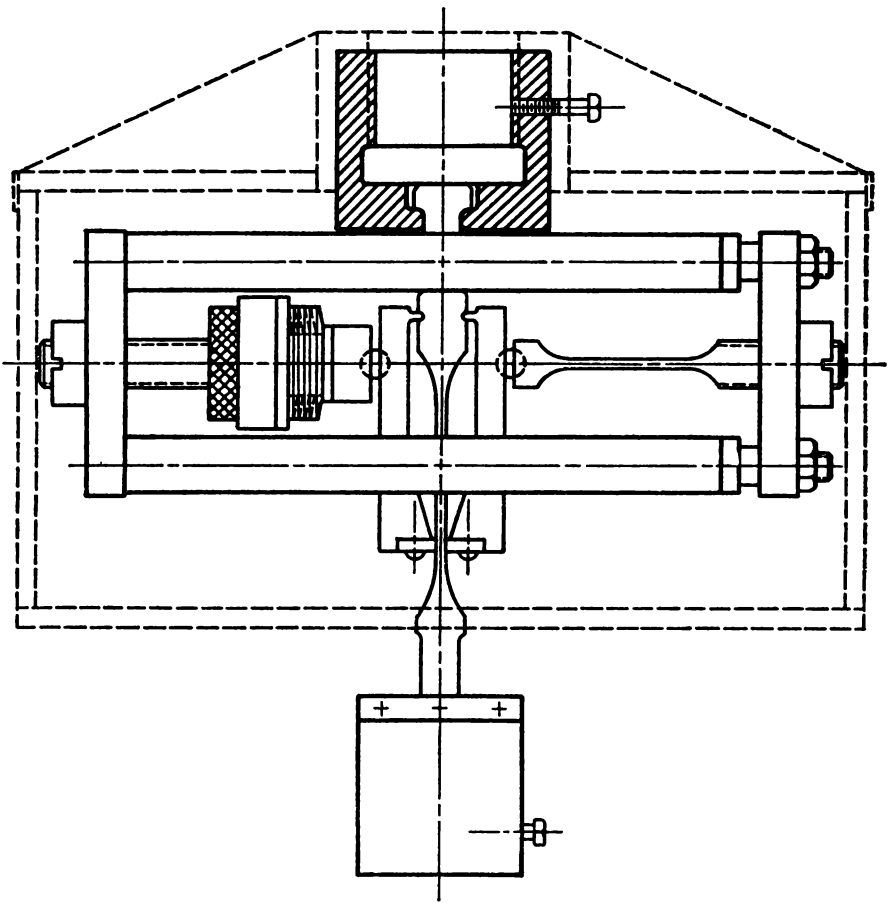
Assembly Drawing of Fretting Fatigue Fixture
